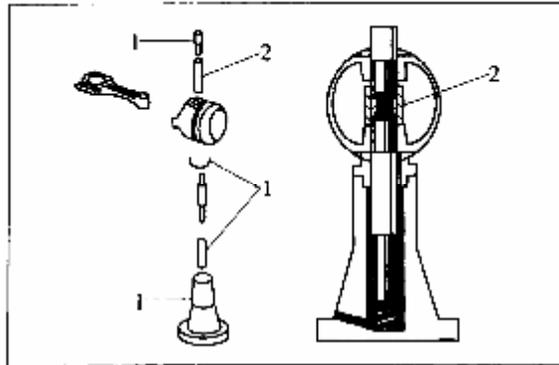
Special Tools to assemble Piston and Connecting Rod Assemblies
